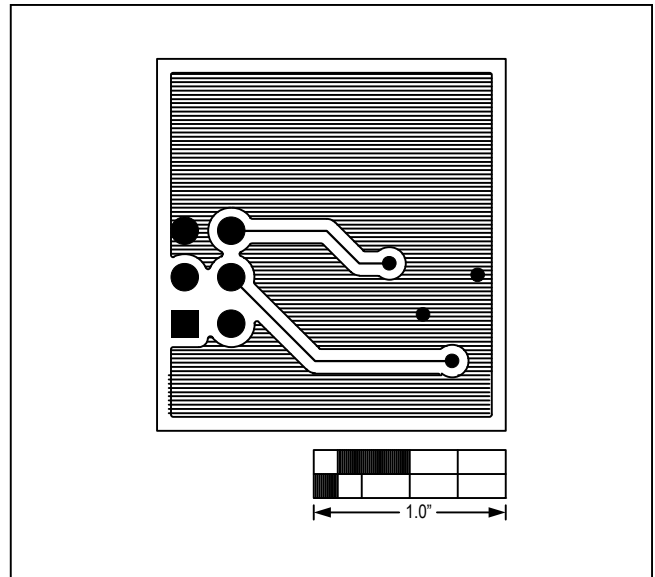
MAX44006 Daughter Board PCB Layout—Bottom
